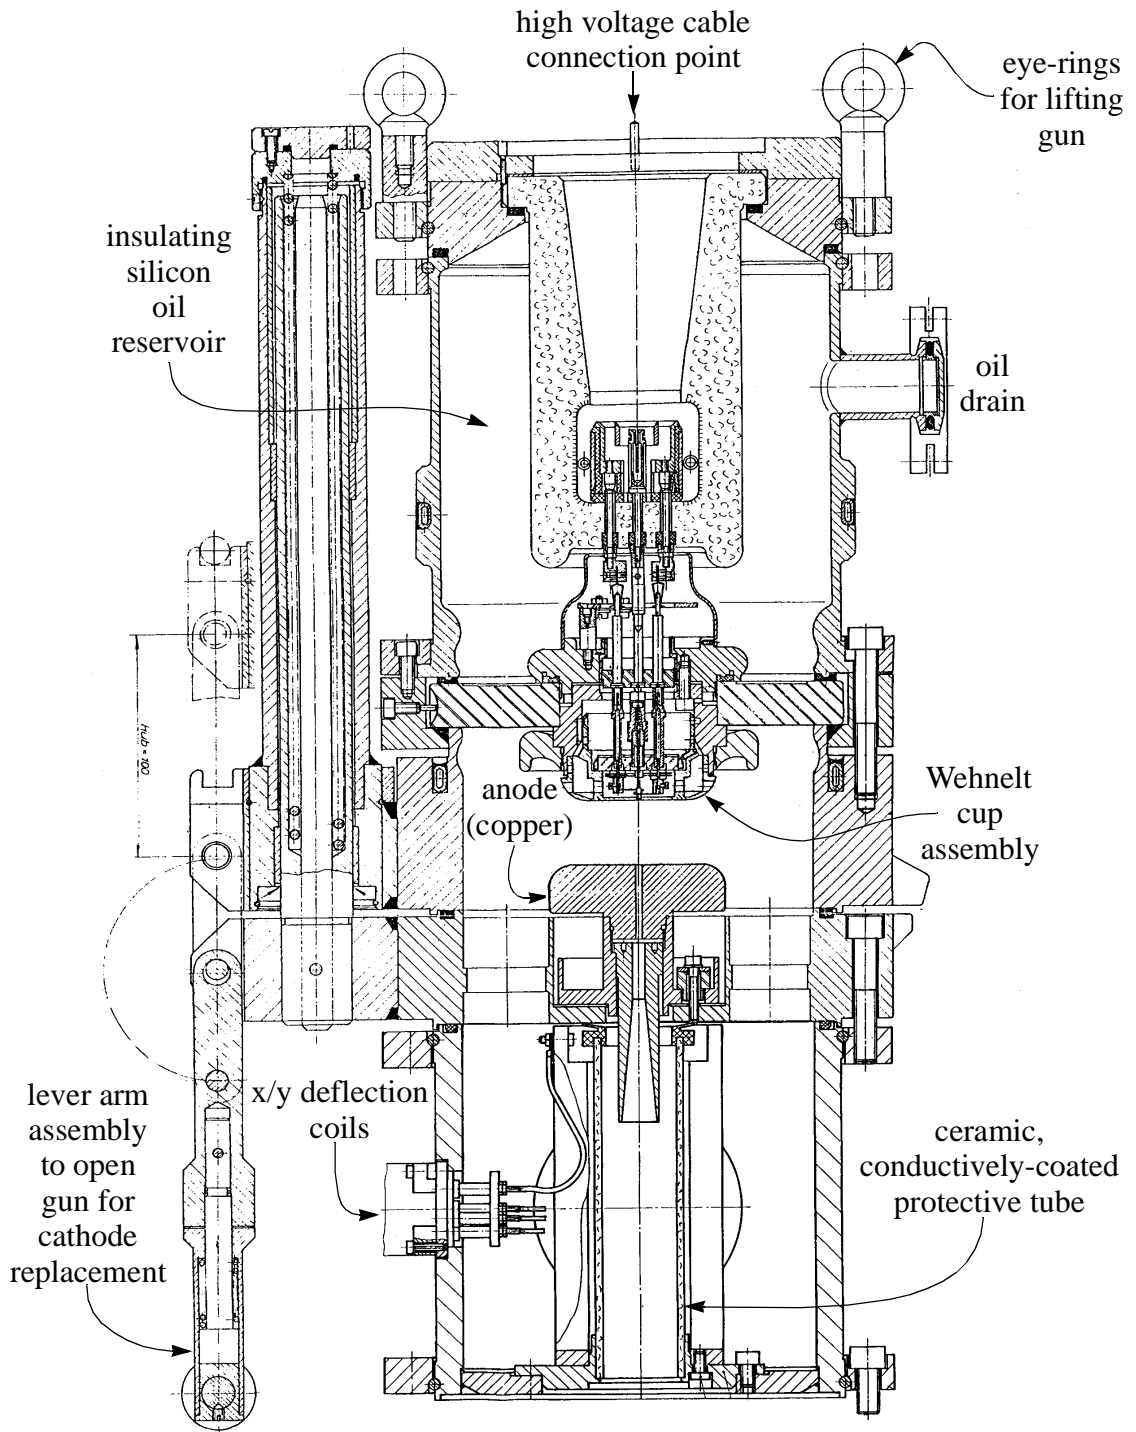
Beam Generating Assembly, top portion of DVD e-beam gun.
